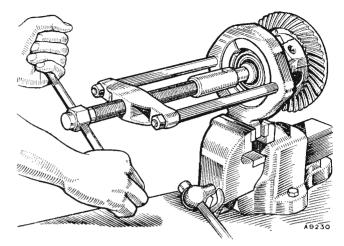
Remove the differential bearings, using remover 18G 47 C with adaptor 18G 47 M
